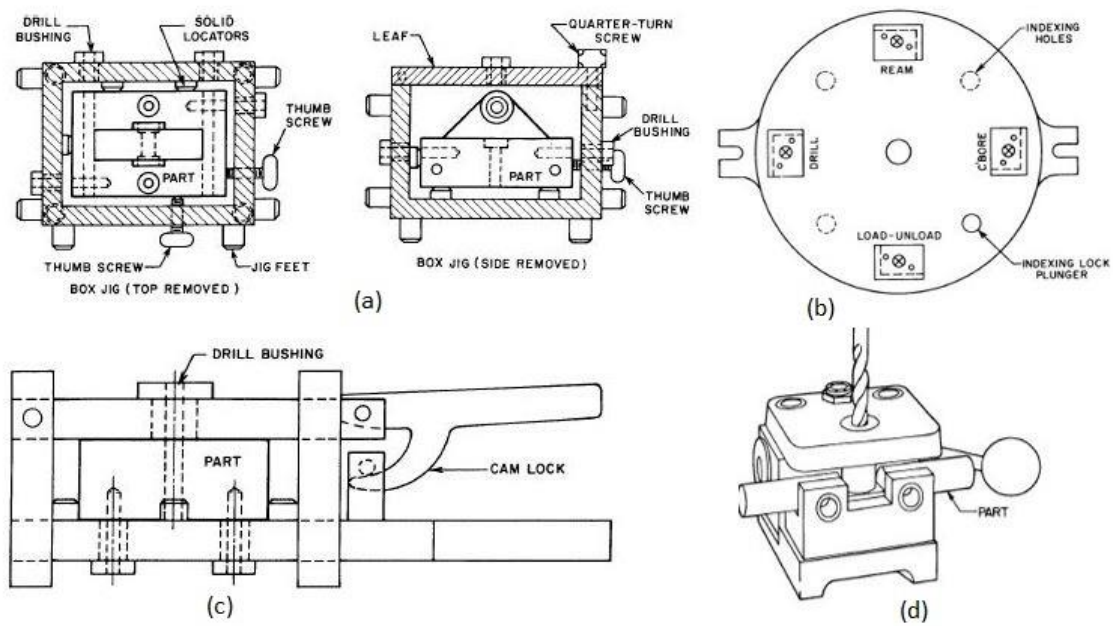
(a) Box jig (b) Multistation jig (c) Leaf jig (d) Trunnion jig [22].
